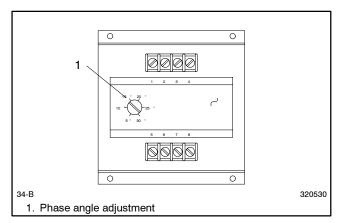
Accessory DA-34-B—Sync Check Relay Assembly
